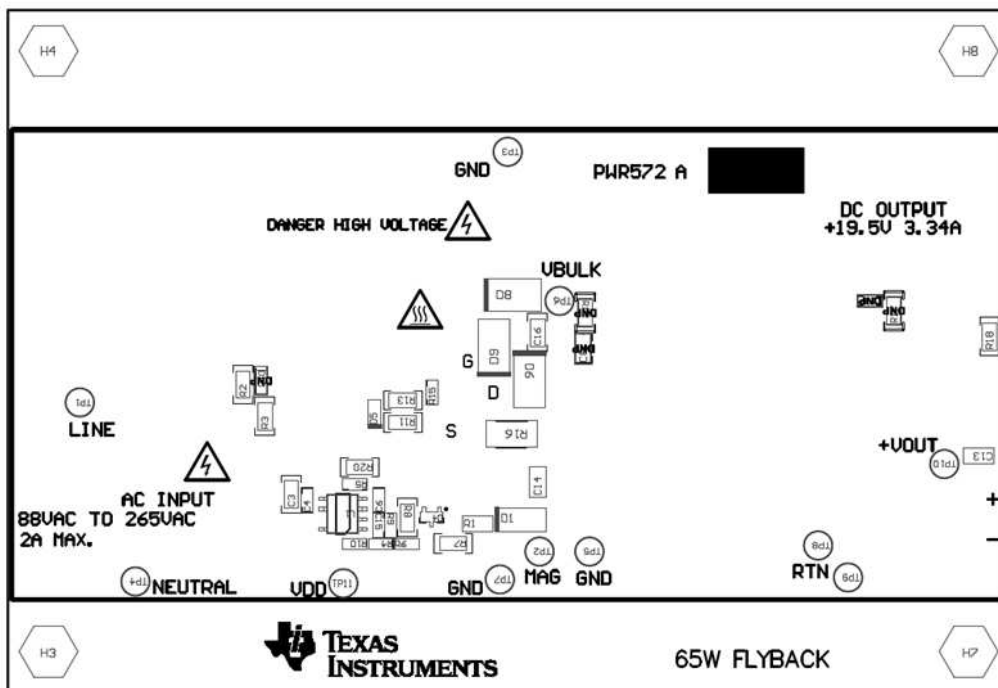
UCC28630EVM-572 Bottom Layer Assembly Drawing (bottom view)
